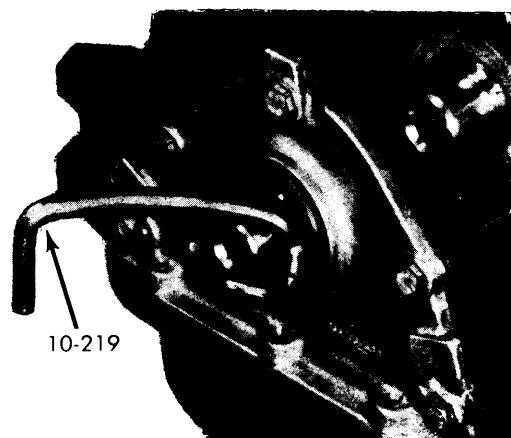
Using Special Tool to Install Rear Main Oil Seal
